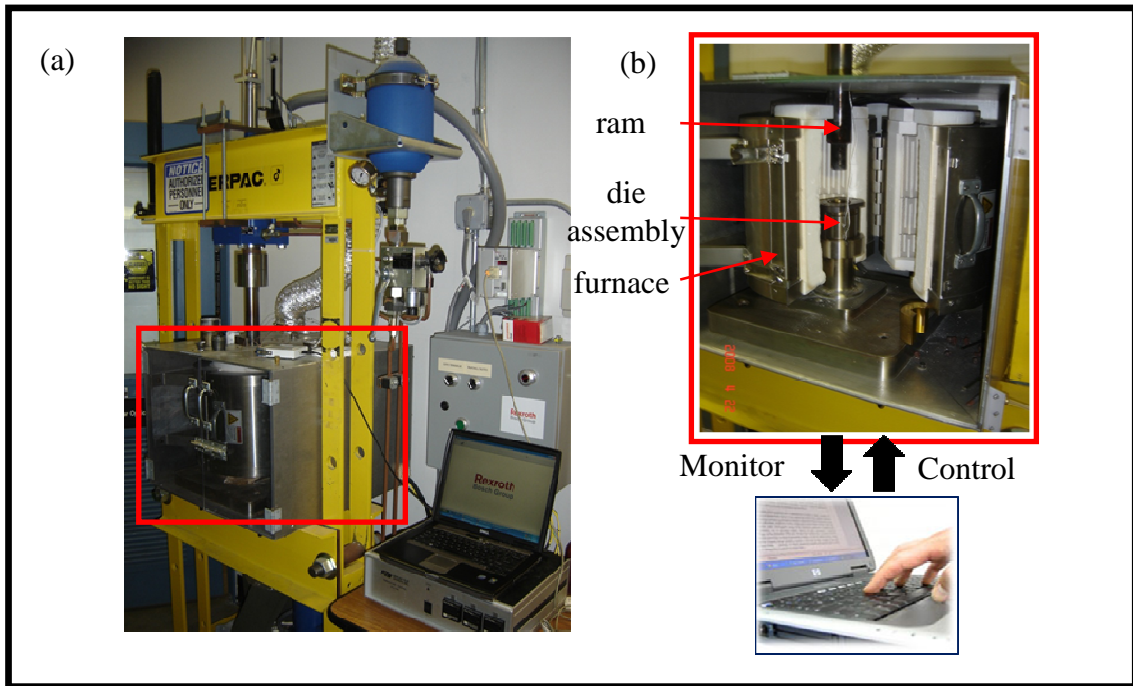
(a) The laboratory vertical glass extrusion press and (b) the tooling assembly inside the furnace
